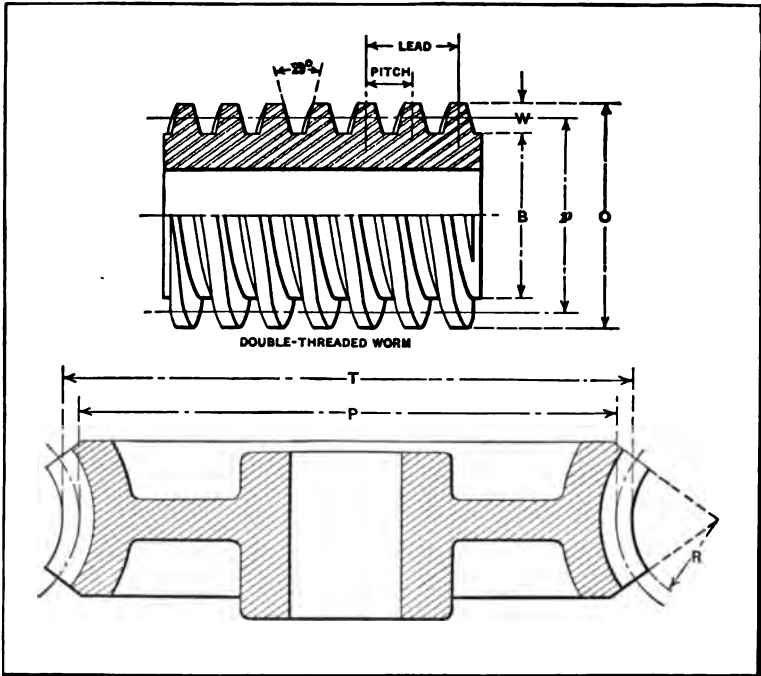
Double-threaded Worm—Sectional View of Worm-wheel
